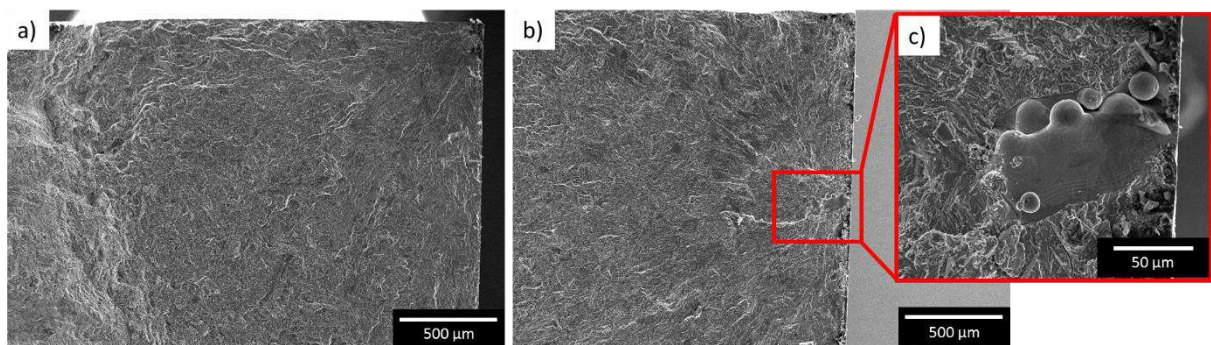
Examples of fracture surfaces a) of HIPed specimen and b) & c) S-HIPed specimen [16]
